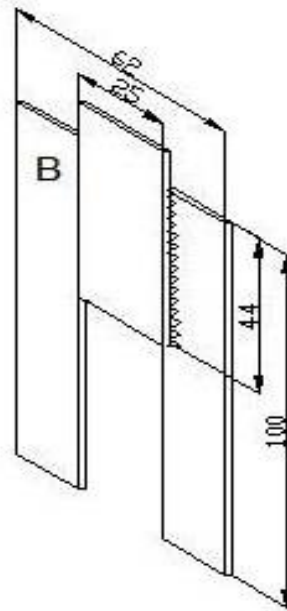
The sample cut scheme for tearing on the tensile testing device
